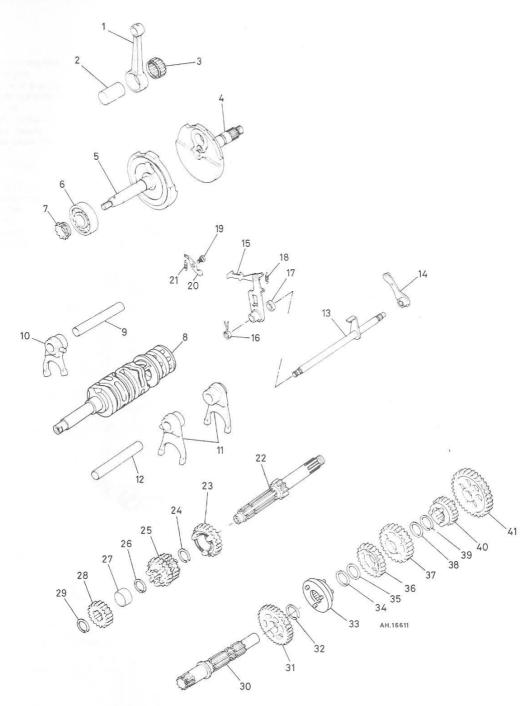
Bottom end - KLT110 (Sec 28)
